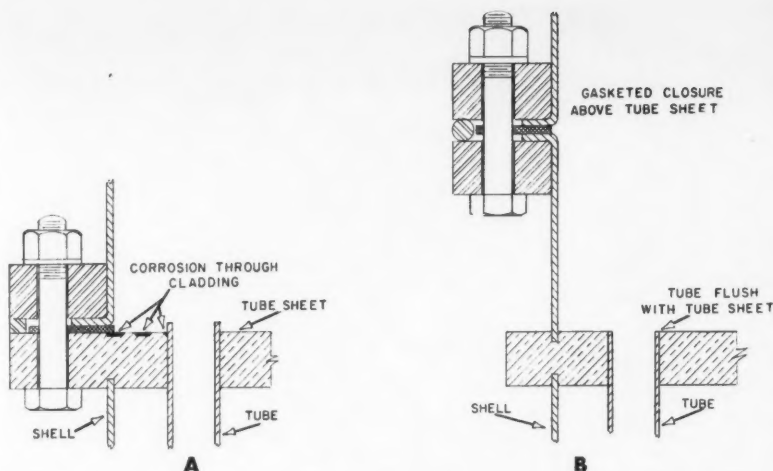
Corrosion of cladding on an evaporator tube sheet near closure shown in A; method of preventing such corrosion shown in B.
